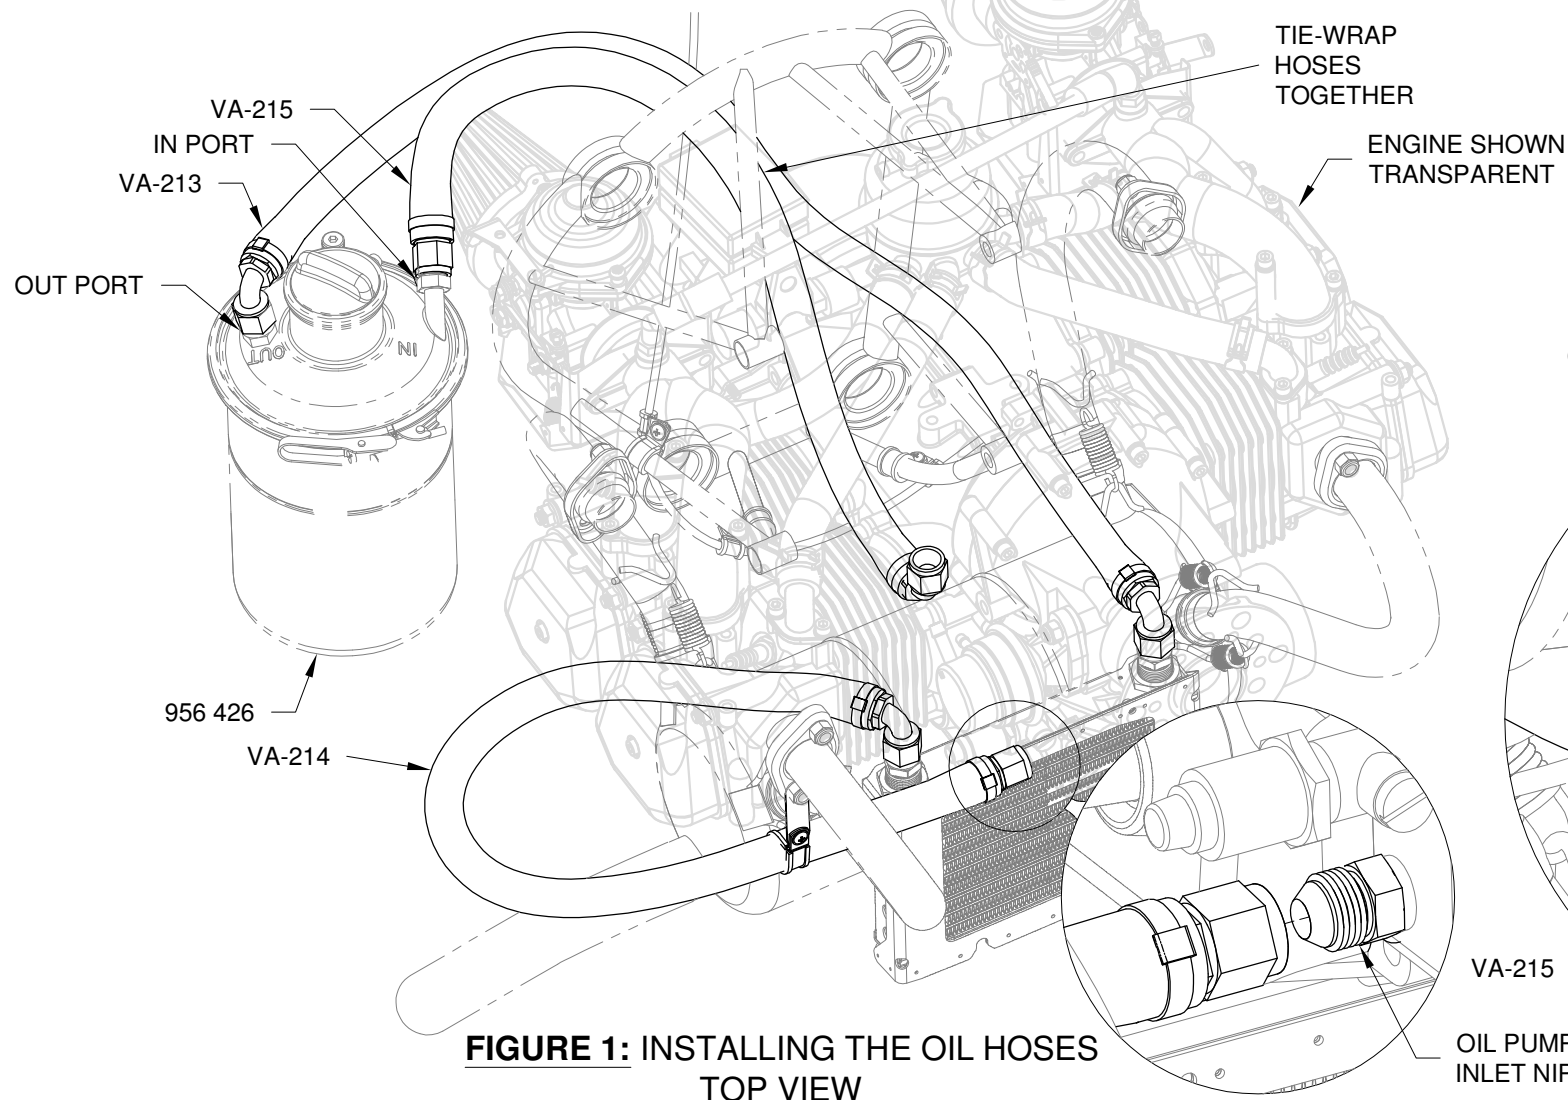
INSTALLING THE OIL HOSES TOP VIEW
